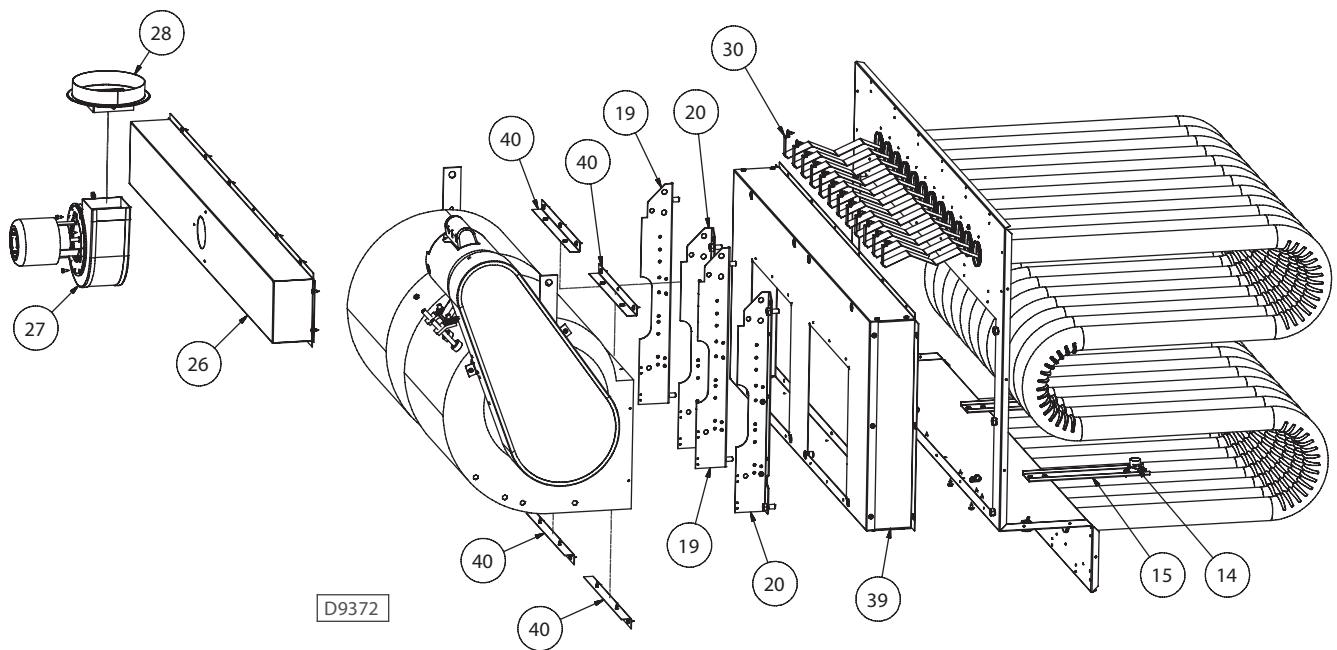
Exploded View - Less Jacketry and Controls, Dual Blower
